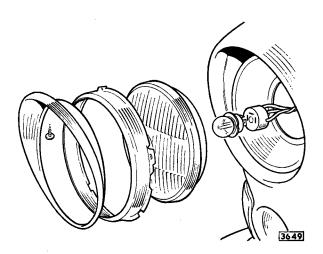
The outer headlight unit removal (non-sealed beam unit)
